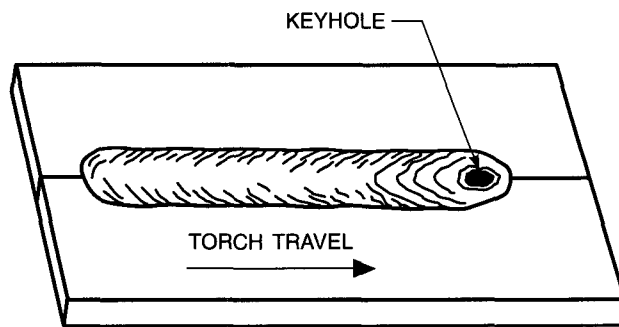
Pictorial Representation of the Keyhole in Plasma Arc Welding
